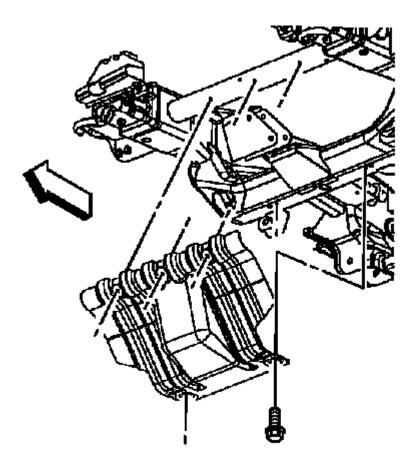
View Of Engine Protection Shield Courtesy of GENERAL MOTORS CORP.
